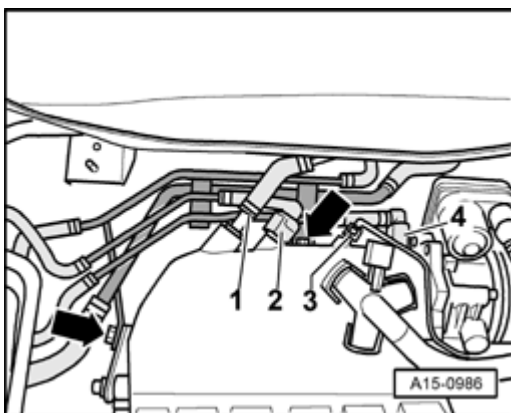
Disconnecting Vacuum Hoses At Rear Of Intake Manifold
